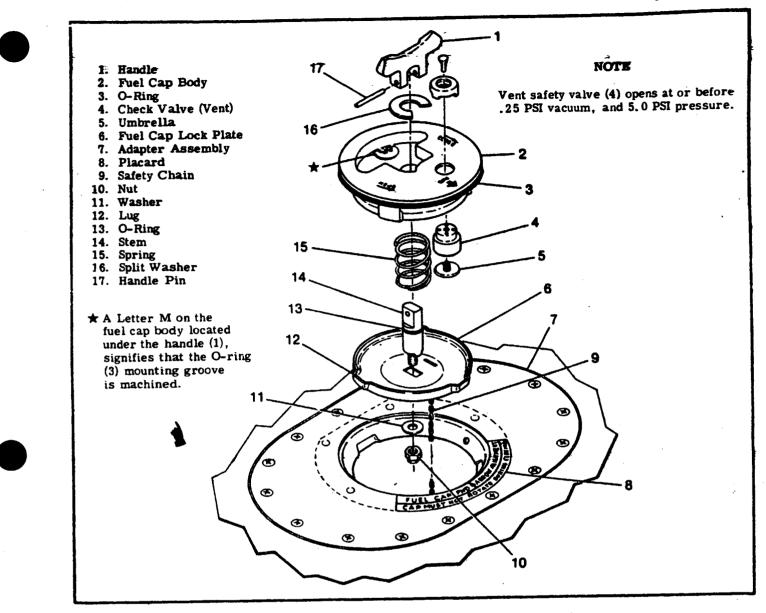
Fuel Filler Cap-Metal (Sheet 1 of 2)
